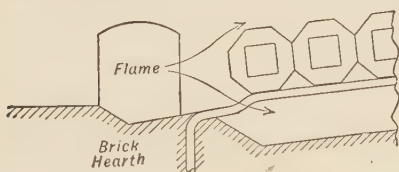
Soaking end of continuous furnace, with pipe skids arranged to roll ingot over when pushed on to soaking hearth.
